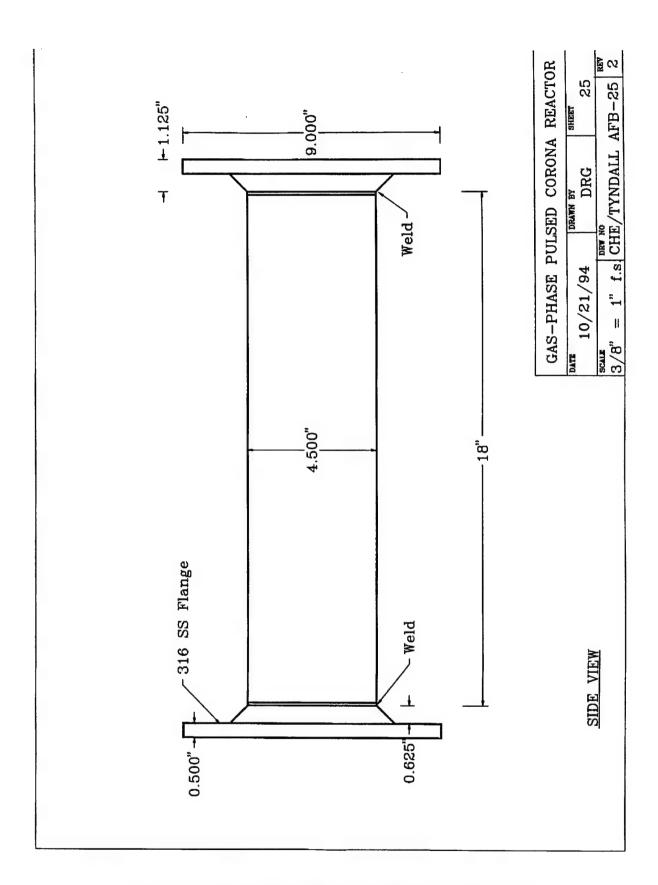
Stainless Steel Tube Portion of Reactor - Side View
